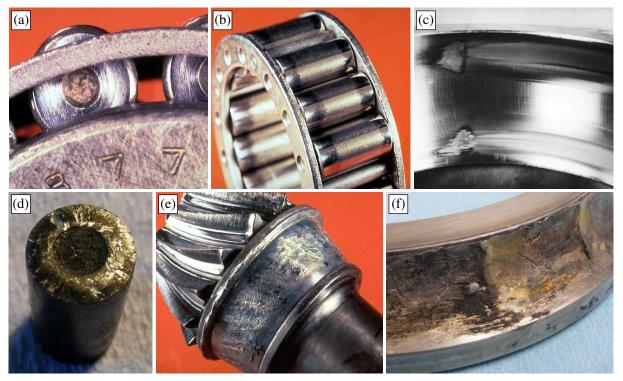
Bearing surfaces damaged by adhesive wear: (a) and (b) wiping of rollers (mild adhesive wear), (c) smearing of outer ring and (d), (e) and (f) change of colour and surface softening and flow of roller and inner rings material (severe adhesive wear).
